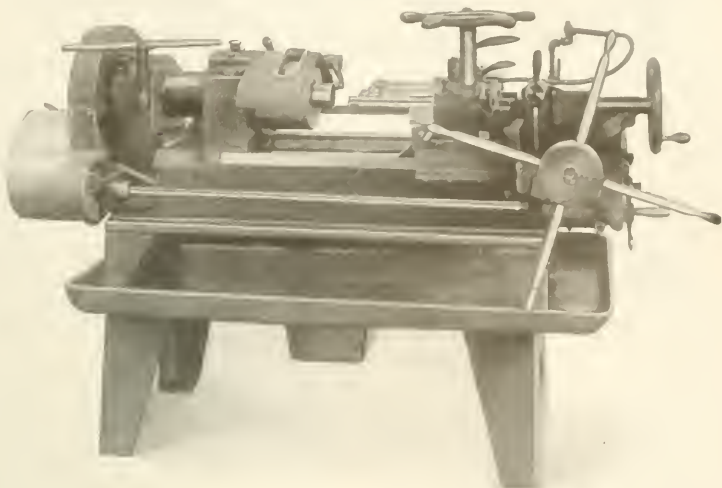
Type B Shell Lathe as equipped for inside boring and reaming
